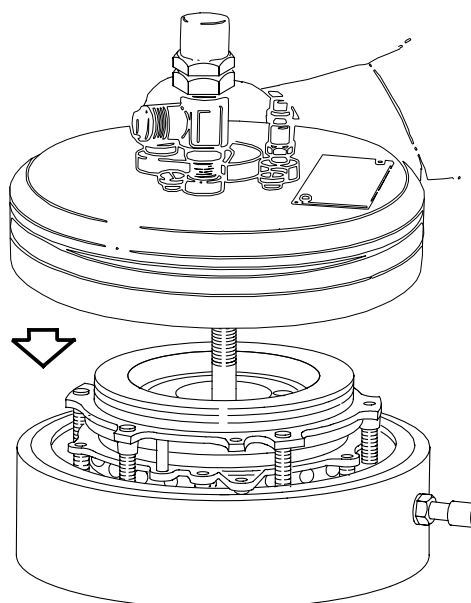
No. 2 and 3 Bearing Seal Assembly - Air Leak Check
